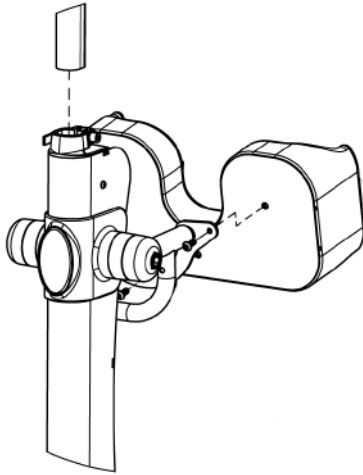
Attach the pump handle onto the pump on the main frame with bolts and tighten securely. Insert top of handle into pump handle and tighten securely.
